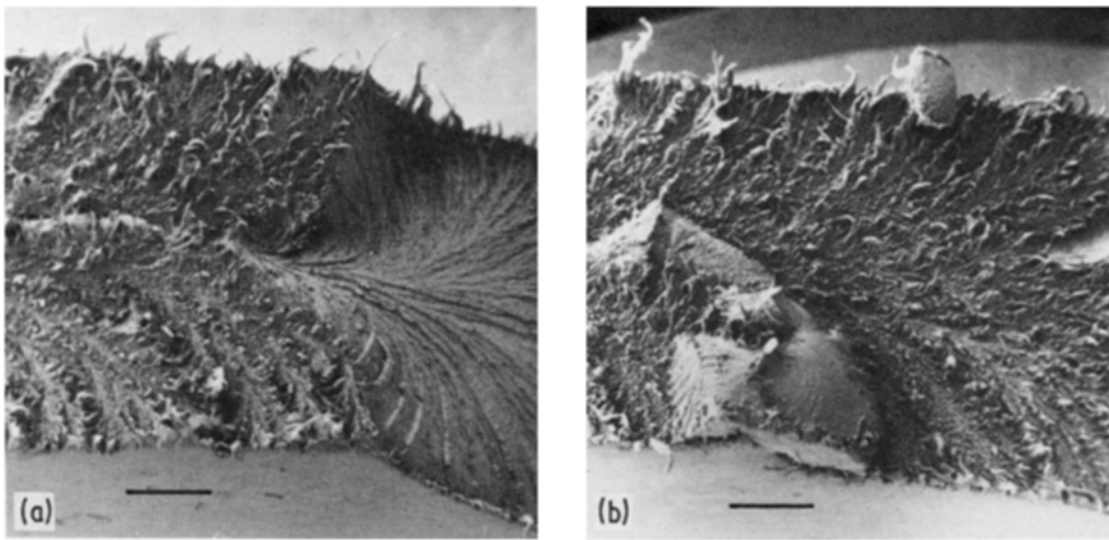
(a) Fracture surface showing centre initiated branch. Scale = 50 μm . (b) Fracture surface showing branch which formed as a continuation of the main branch.
